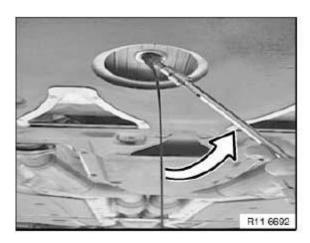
Screwing Plug Using Extension With Socket Courtesy of BMW OF NORTH AMERICA, INC.
